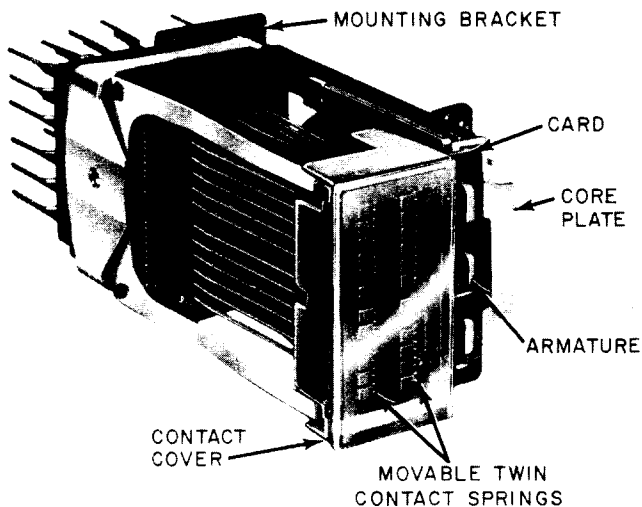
24-Position Wire Spring Relay With 24 Twin Break Contacts—Contact Cover In Place
